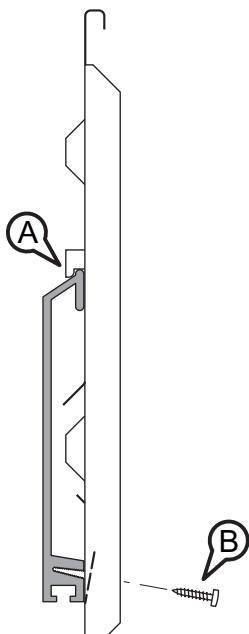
Side view of a mounting plate on an S7 standard rail
